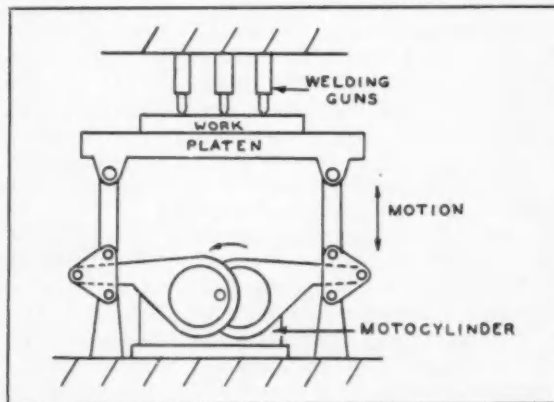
At left is a motocyliner operated press welder shown in the "up" position. Motocyliner is five horsepower and utilizes dynamic braking.
